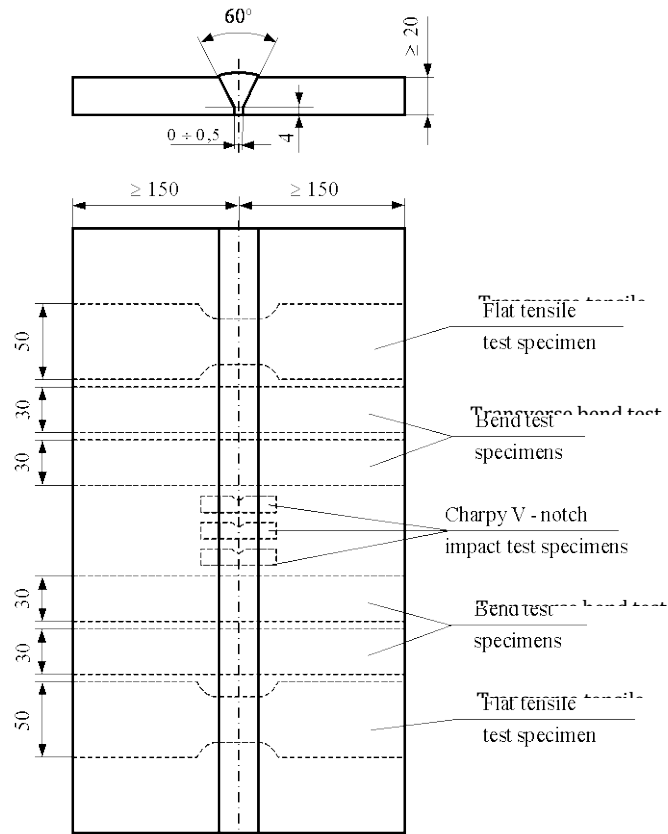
Butt weld test assembly welded with multi-run technique
